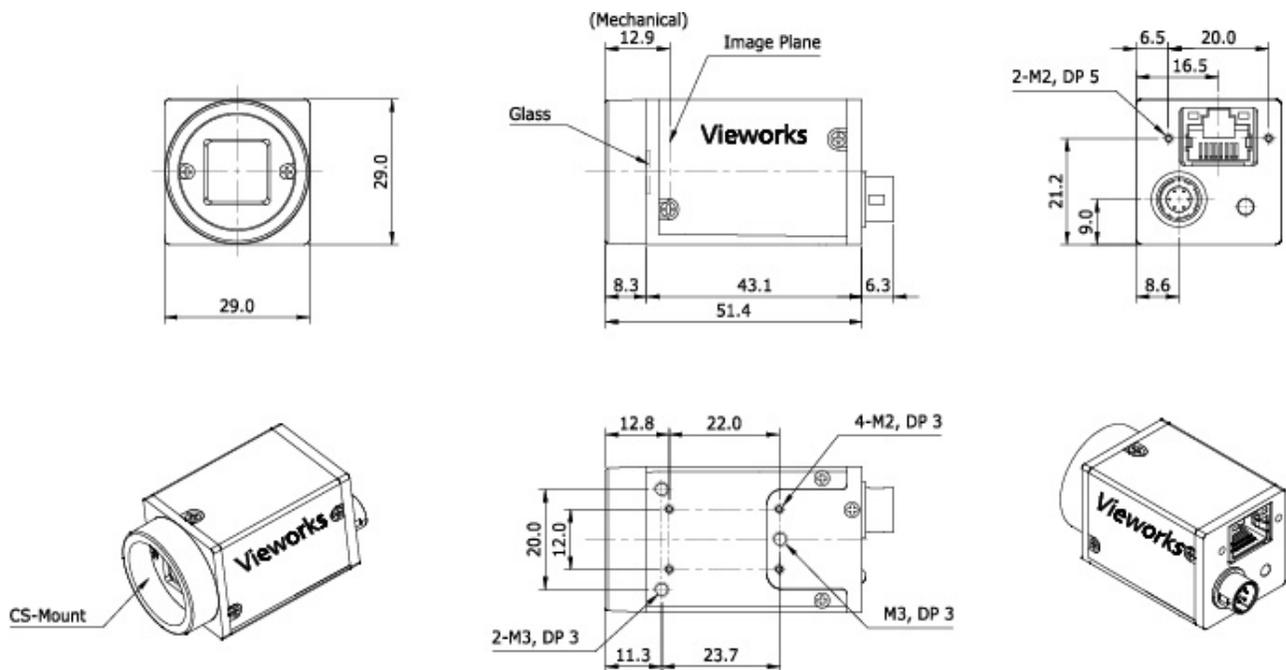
VQ-310G-120, 1300G-30 and 2MG-20 CS-mount Mechanical Dimension
